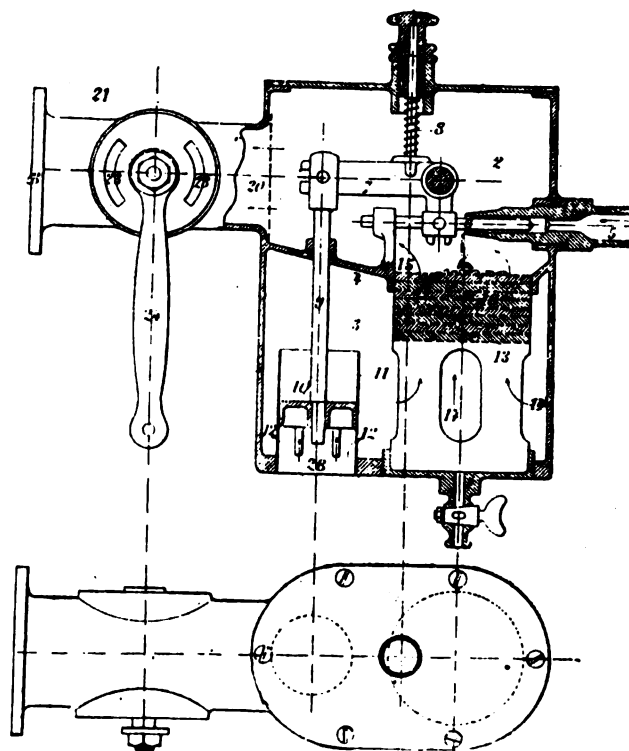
THE DE SALES-BRALEY CARBURETTOR.
